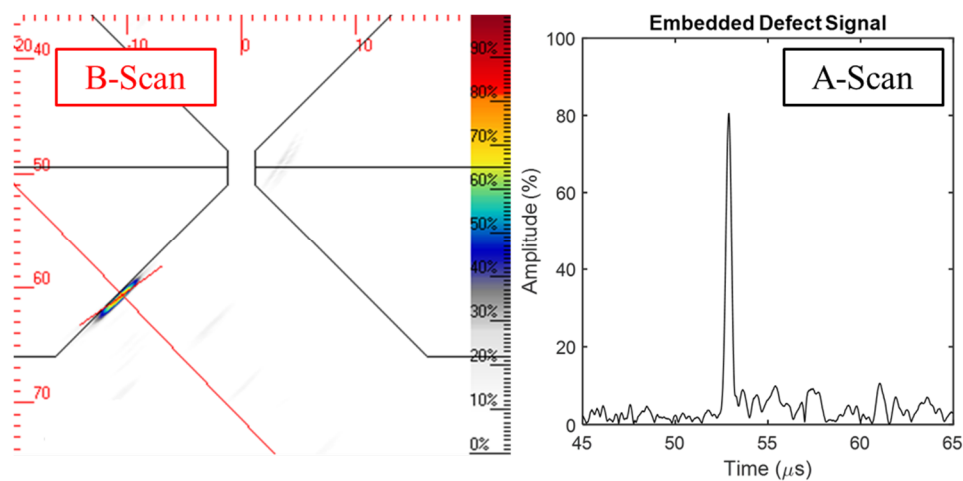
B-Scan (left) and A-scan (right) of embedded tungsten tube defect taken during cold ultrasonic testing for verification
